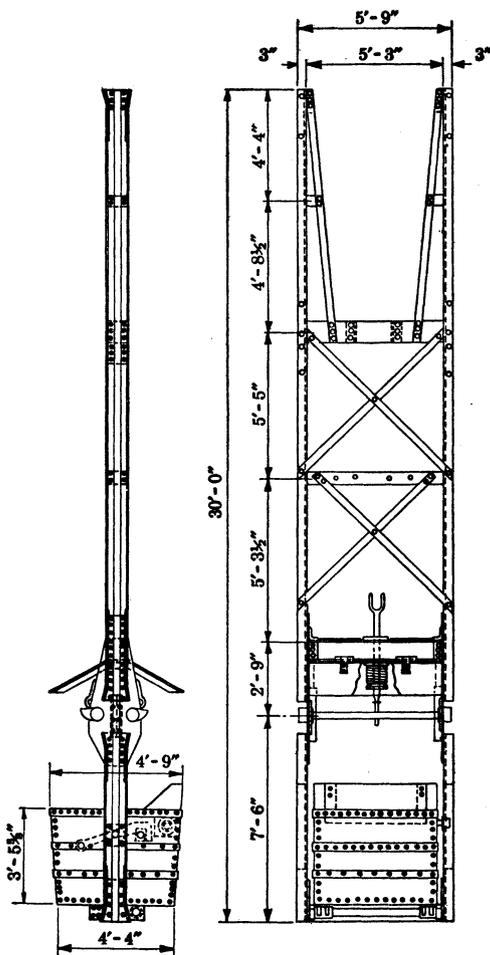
Sinking skip used at Frood No. 3 shaft
